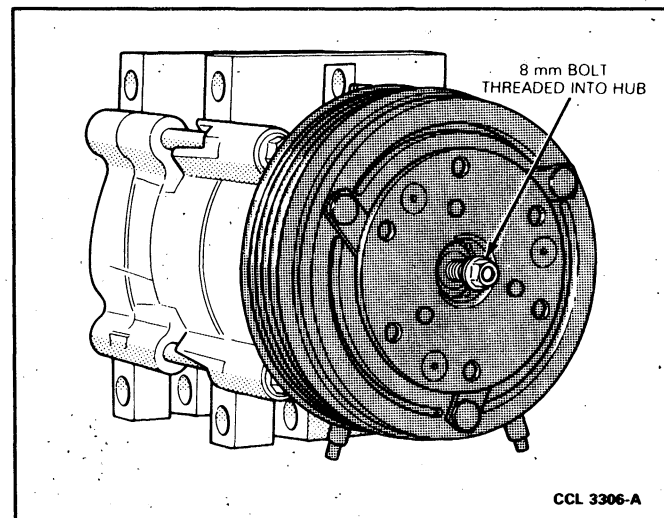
Removing Clutch Hub with 8 mm Bolt
